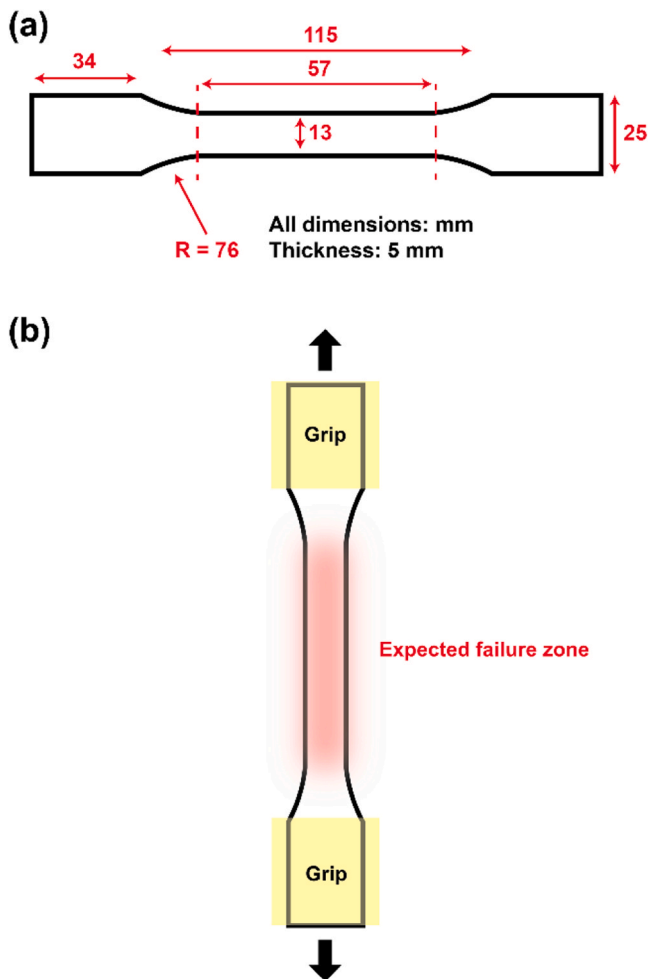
Schematic illustrations of (a) ASTM D638-Type 1 specimen and (b) failure location for valid uniaxial tensile testing.
